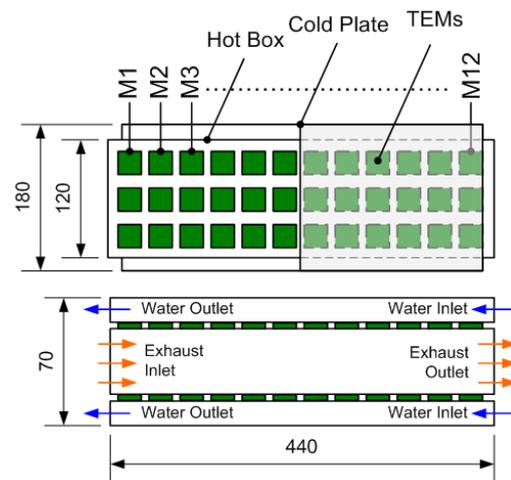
Schematic of Nissan ETEG showing the basic dimensions in mm
